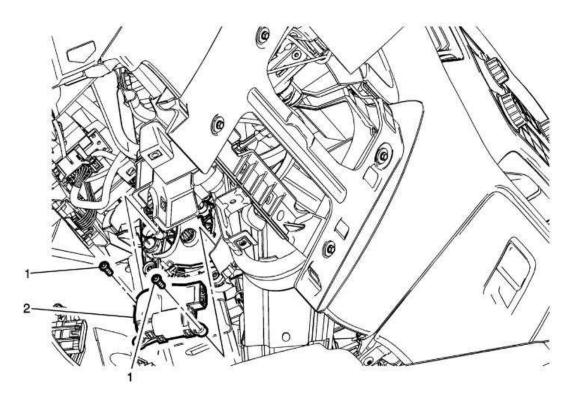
Mode Valve Actuator Courtesy of GENERAL MOTORS COMPANY
